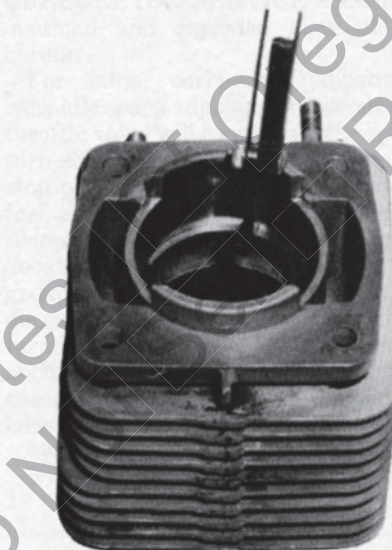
Clearance between ends of ring (ring end gap) should be measured with feeler gage as shown. Make sure ring is straight in cylinder.
